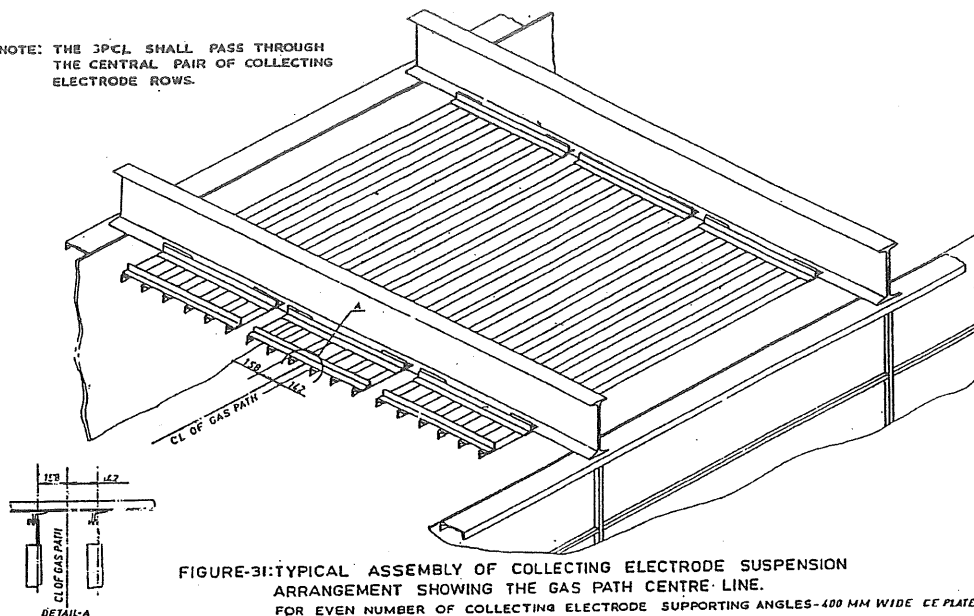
TYPICAL ASSEMBLY OF COLLECTING ELECTRODE SUSPENSION ARRANGEMENT SHOWING THE GAS PATH CENTRE LINE. FOR EVEN NUMBER OF COLLECTING ELECTRODE SUPPORTING ANGLES - 400 MM WIDE CE PLATE
